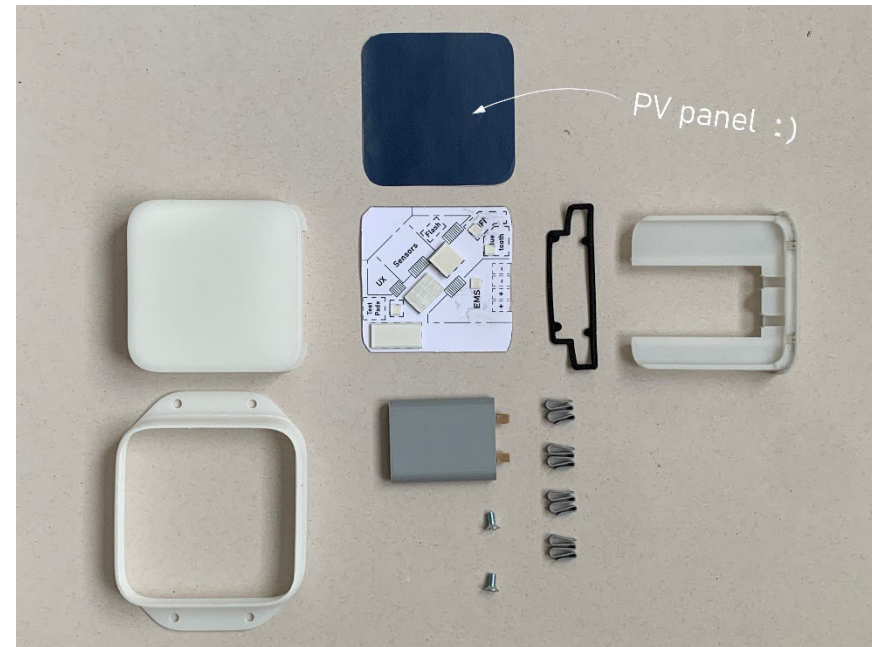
Component and fastener overview after complete disassembly (excluding interior mounting bracket)
